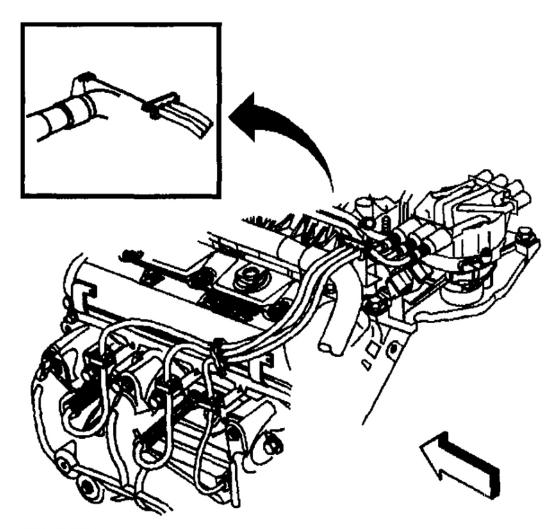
View Of Water Pump Inlet Hose & Clamps Courtesy of GENERAL MOTORS CORP.
